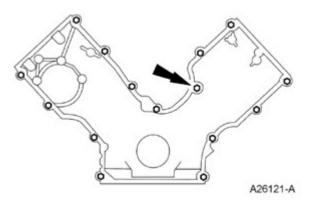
Locating Front Oil Pan Bolts Courtesy of FORD MOTOR CO.
